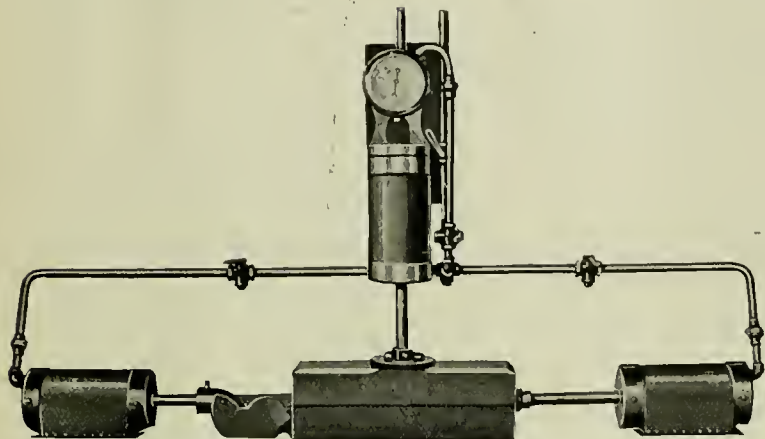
MACHINE FOR FITTING UP HOSE ON SOUTHERN RAILWAY.
